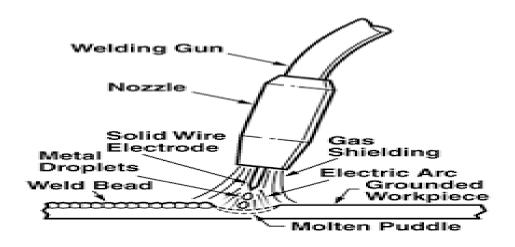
Gas Metal Arc Welding (GMAW)
